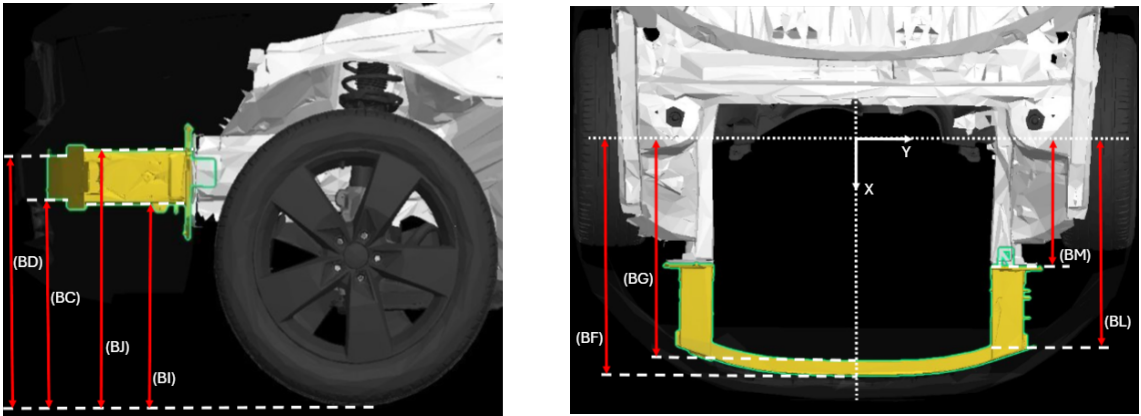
Measurements for Crash Can & Bumper Crossbeam - Side & Top views [25]
